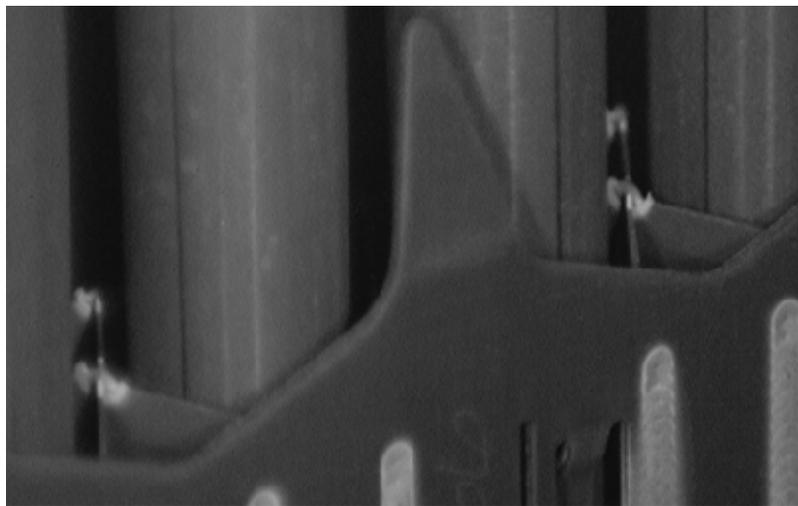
Condition of Zr1%Nb grid 14 weld joints, WLTA AA03-03, face 1, inspection 2007.
